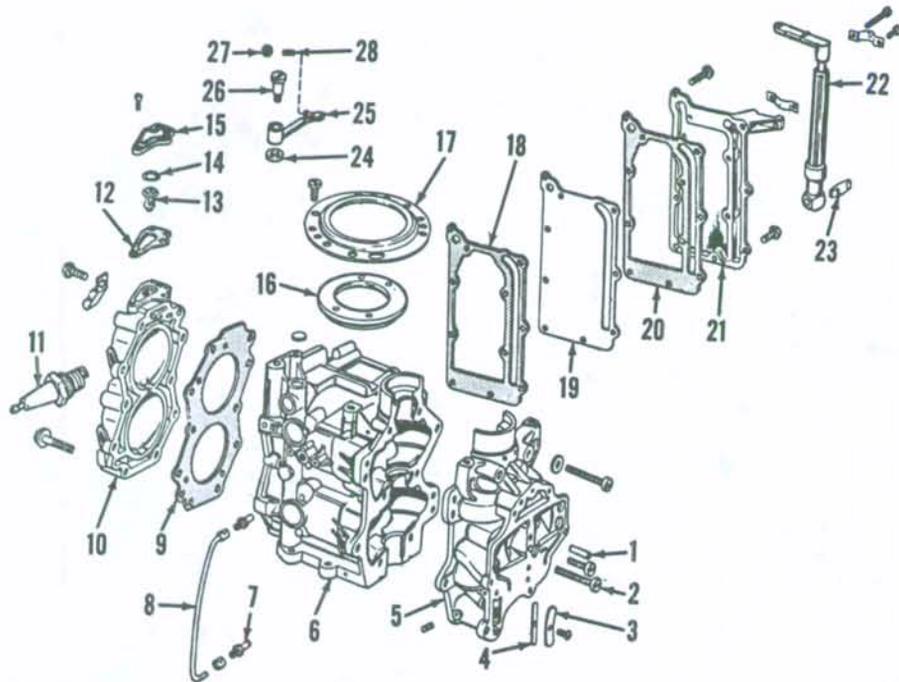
Exploded view of power head of the type used. Speed control lever (22 & 23) is used only on 6 hp models; armature detent (24 through 28) only on 5 hp units.
